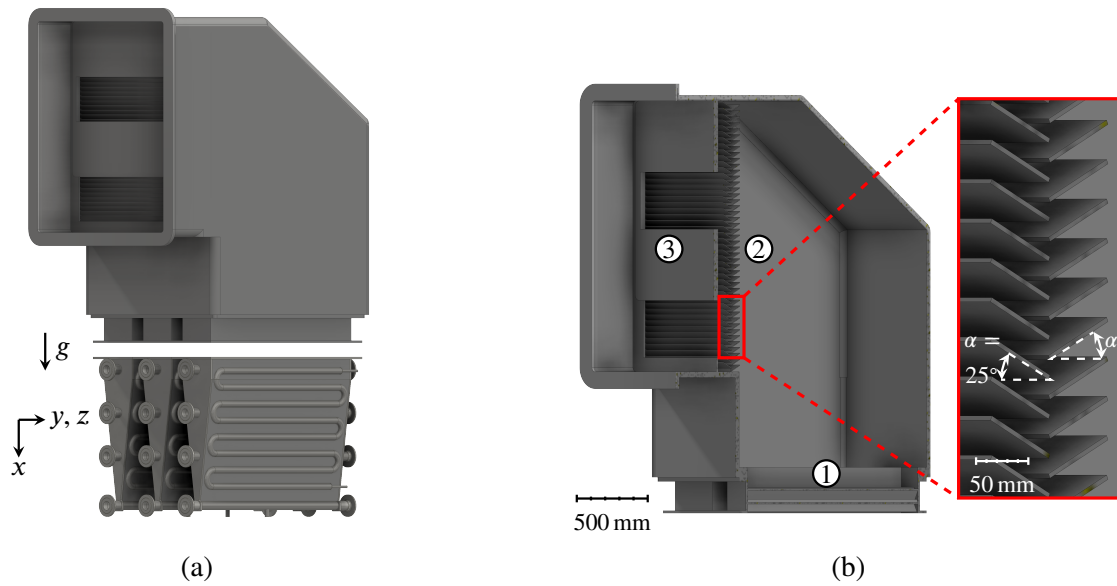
(a) CAD drawing of the preliminary mercury baffle adapter. Three LDPs are connected to the MBA in parallel via the bottom flanges (depicted in exploded view). (b) Half-section view of the MBA to reveal the inner components, which are labeled: ① three parallel first baffle stages and flanges to LDPs (see (a)), ② second baffle stage, ③ linear high vacuum gate valve. The cutout on the right provides a detailed view on the offset baffle configuration used in both stages.
